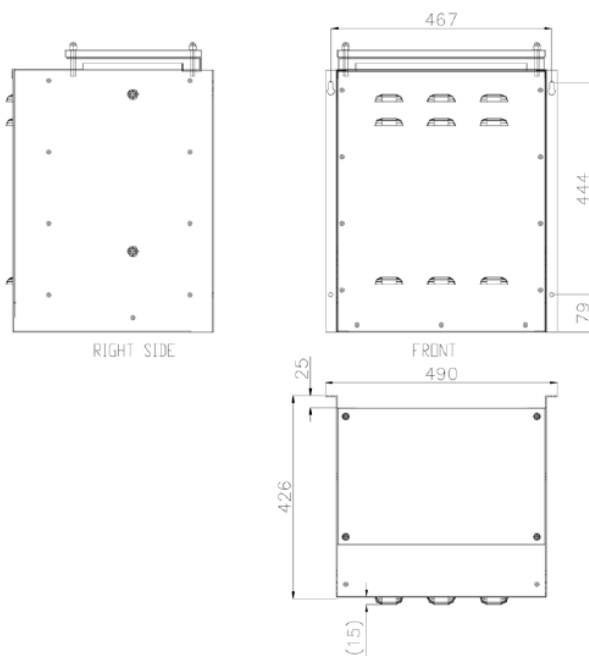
Typical dimensions of the steering brake resistor for Azipod CZ
